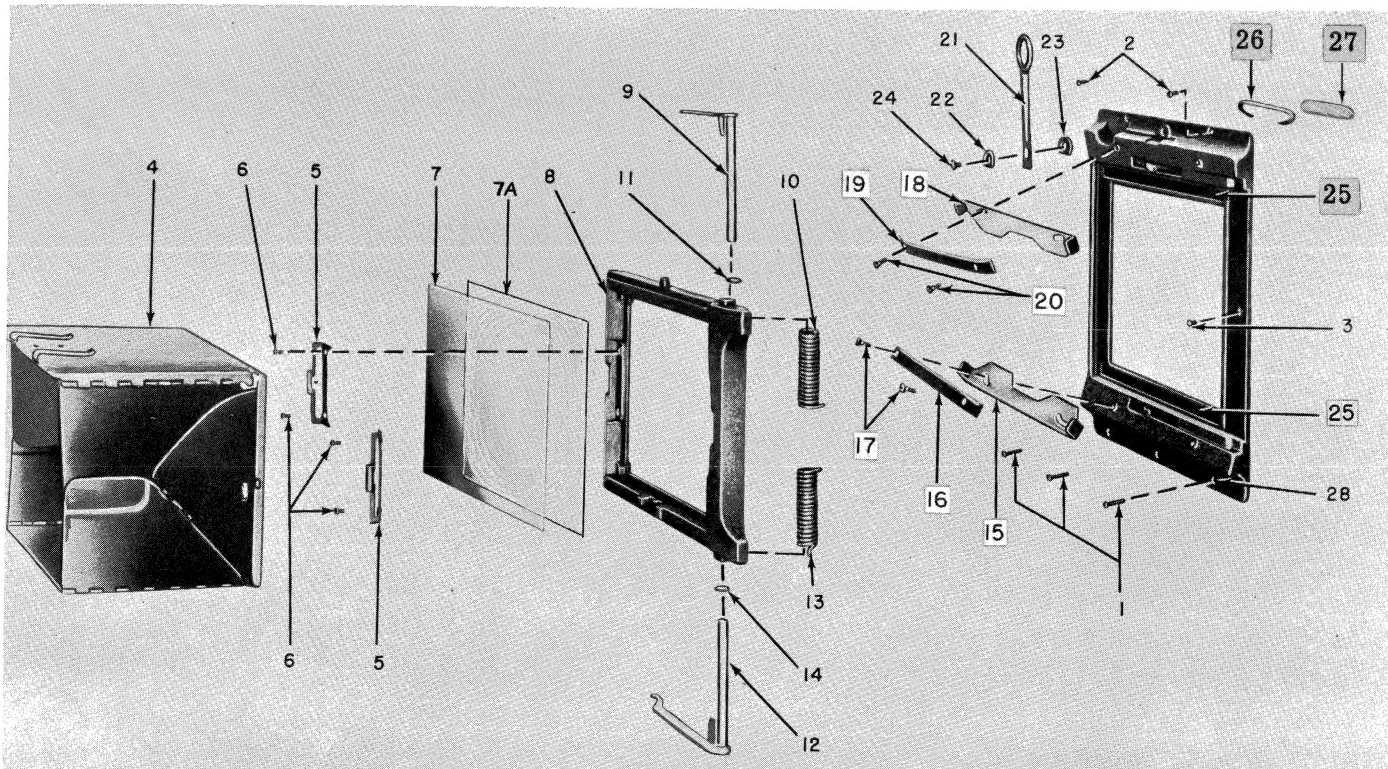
4 x 5 Graflok Camera Back, Exploded View
